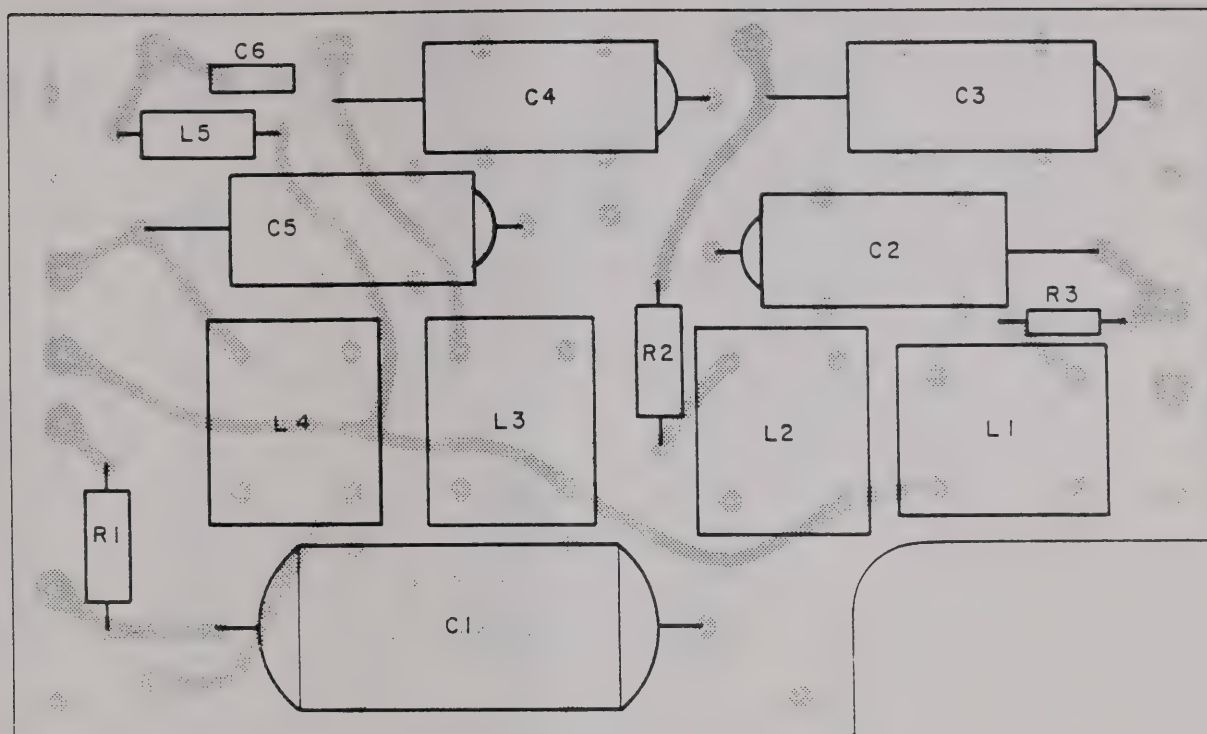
Rear-Deck Supply Decoupling Board A1A3A3, Parts Location
